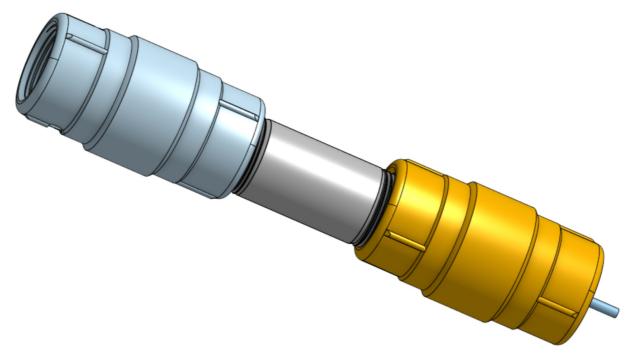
The current design of ram pump consisted of two check valves and a metal rod
